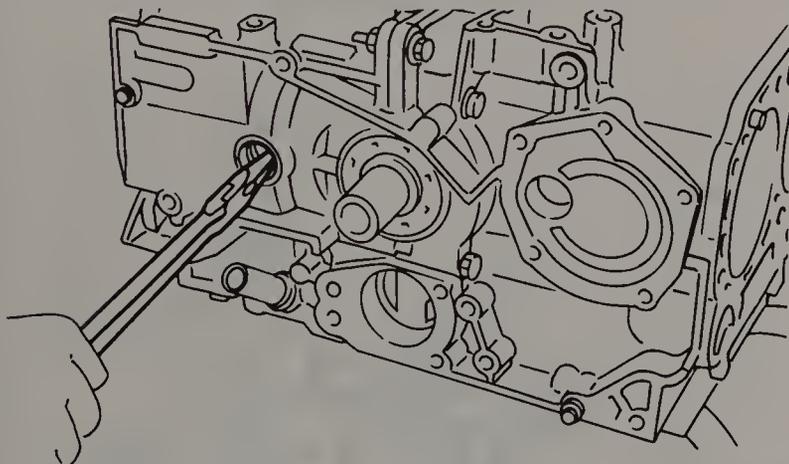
Reach through the service holes to remove the piston pin circlips (Sec 5)
